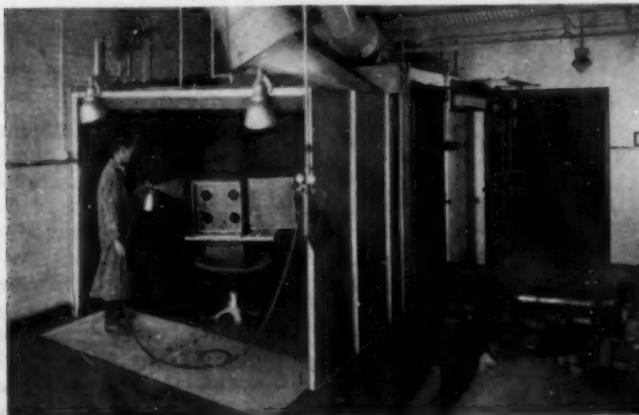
Mounted on a turntable in the large power-ventilated spray booth, big apparatus is sprayed by Thomas Cassidy. The apparatus is later dried in the oven directly behind the booth.
